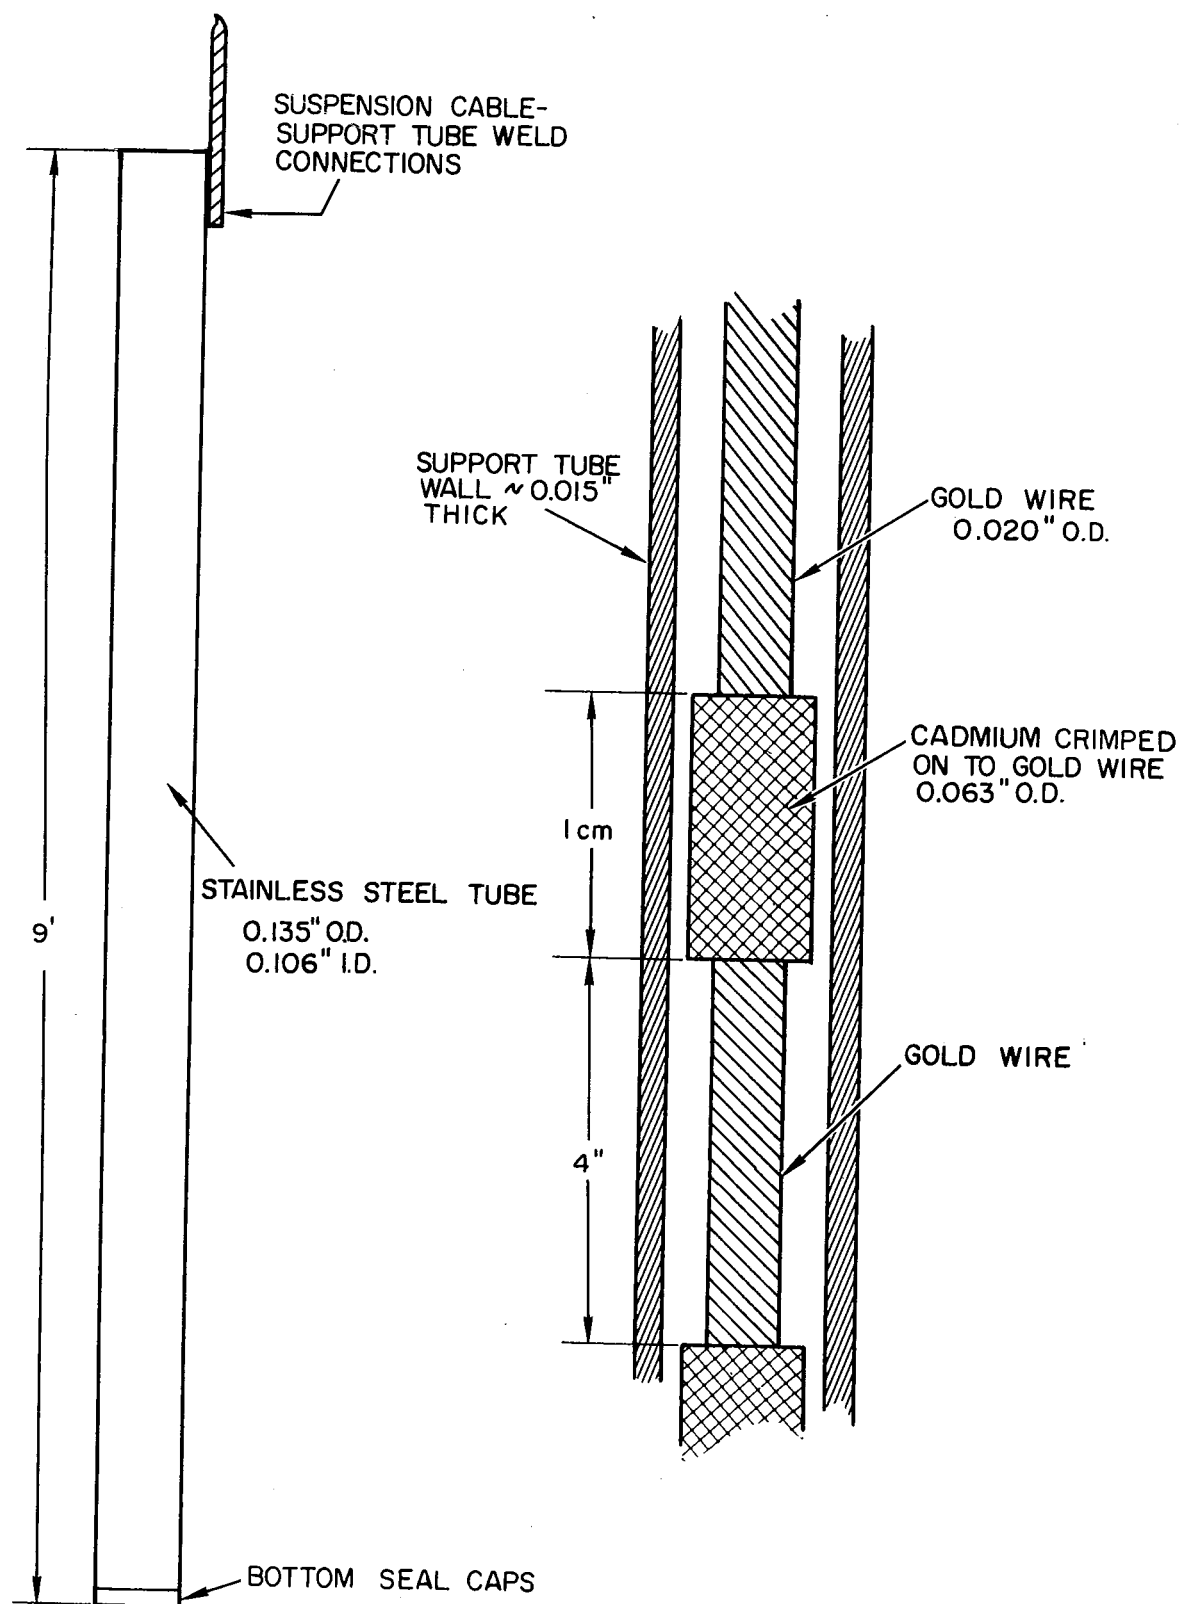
Gold Wire Assembly Inserted in Steel Support Tube
